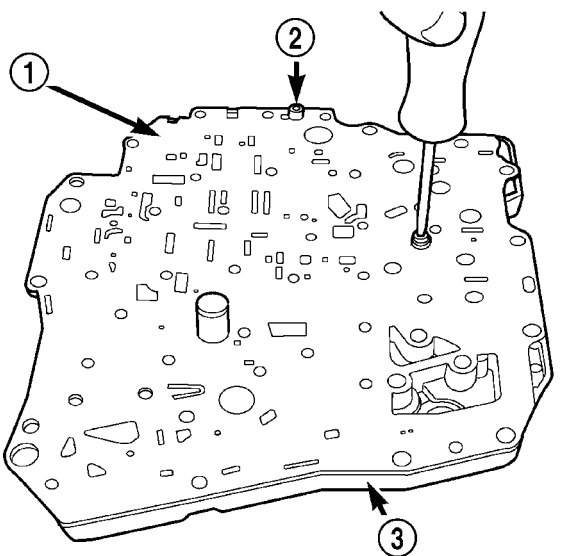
Remove Separator Plate-to-Transfer Plate Screws
